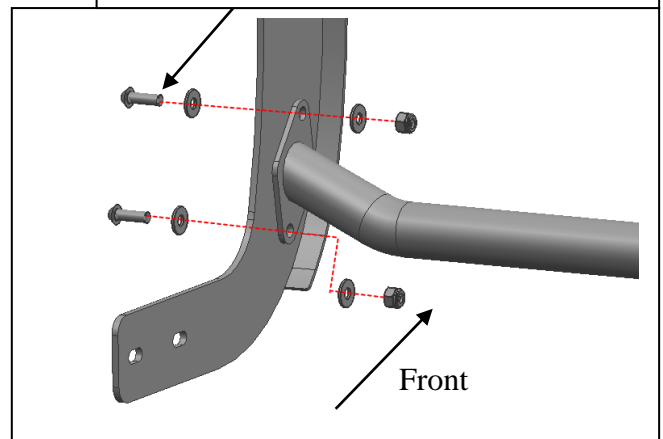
Attach Driver/Left Side Support Bracket to Upright
